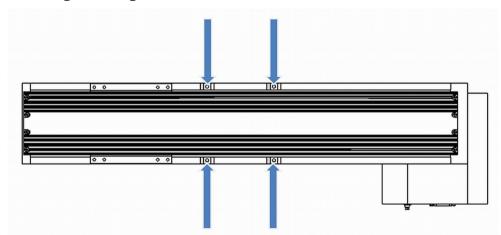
Position of the Ø 5.5 mm mounting holes in the base body of the stage
